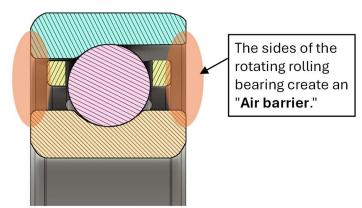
"Air barrier" Formed on the Side of a High-Speed Rotating Bearing
